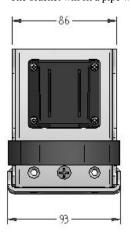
, wall bracket. Figure 4.1.1b, Tron SART20 mounted in wall bracket.
